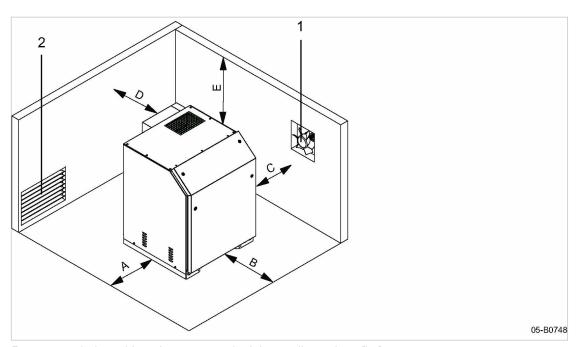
Recommended machine placement and minimum dimensions [in.]
